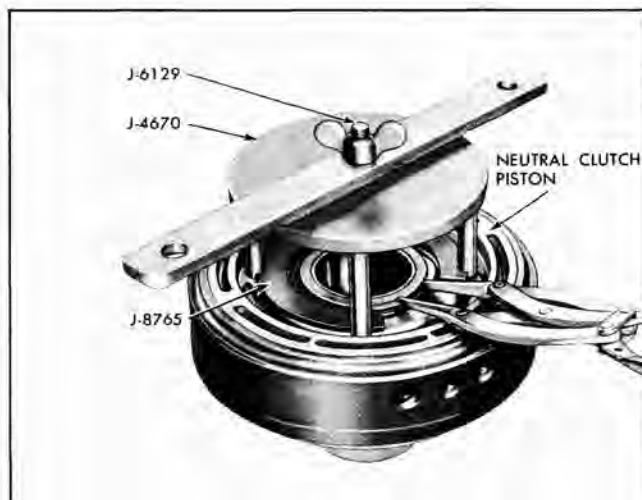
Removing Neutral Clutch Spring Retainer Snap Ring
